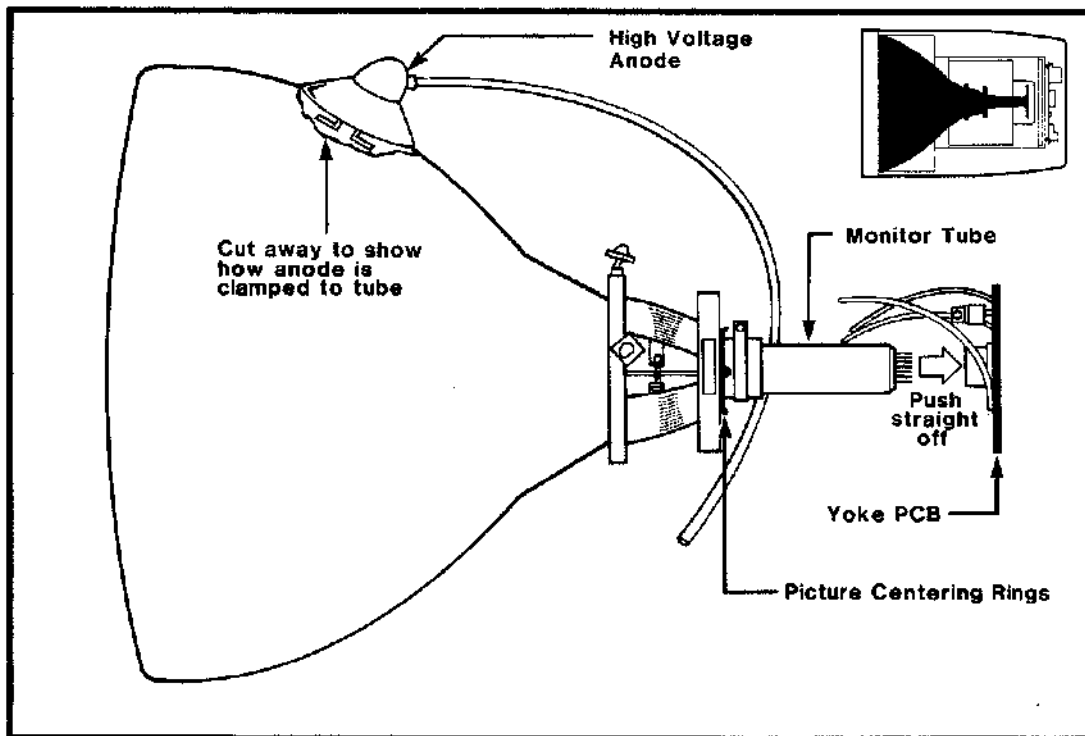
REMOVING THE VIDEO TUBE CONNECTORS
